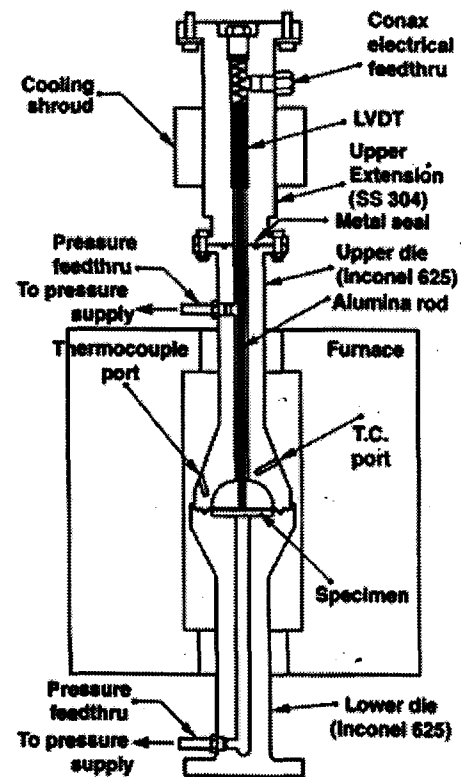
Die assembly of the superplastic forming apparatus using gas pressure
